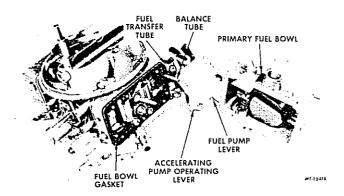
REMOVING OR INSTALLING PRIMARY FUEL BOWL
